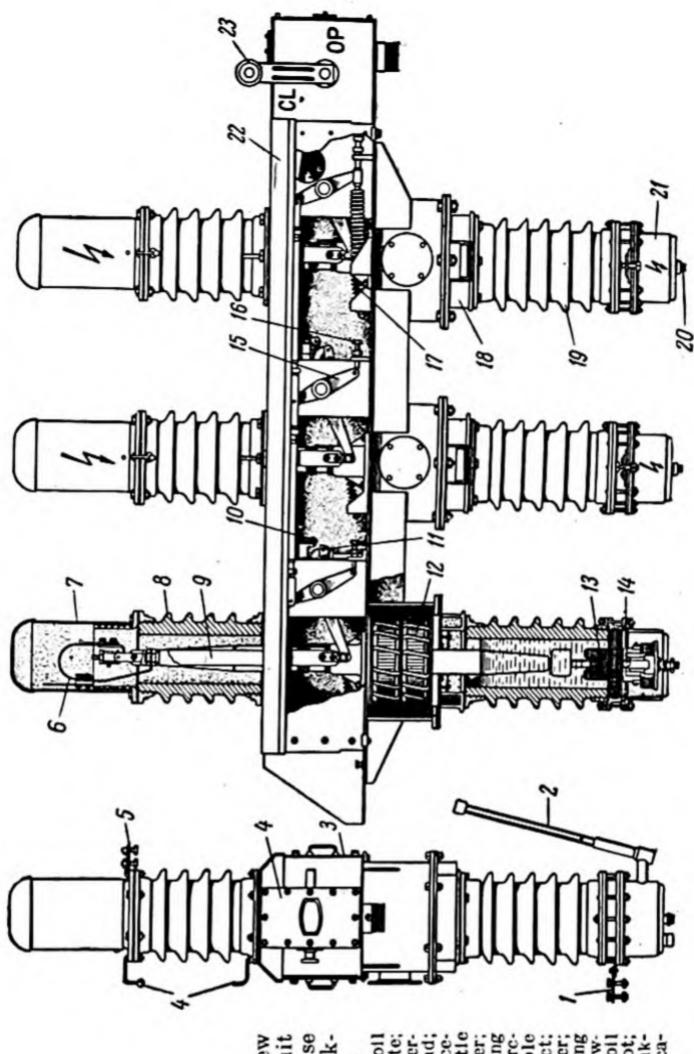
General view of the MF-35 oil circuit breaker with one phase and the actuating linkage shown in section.
